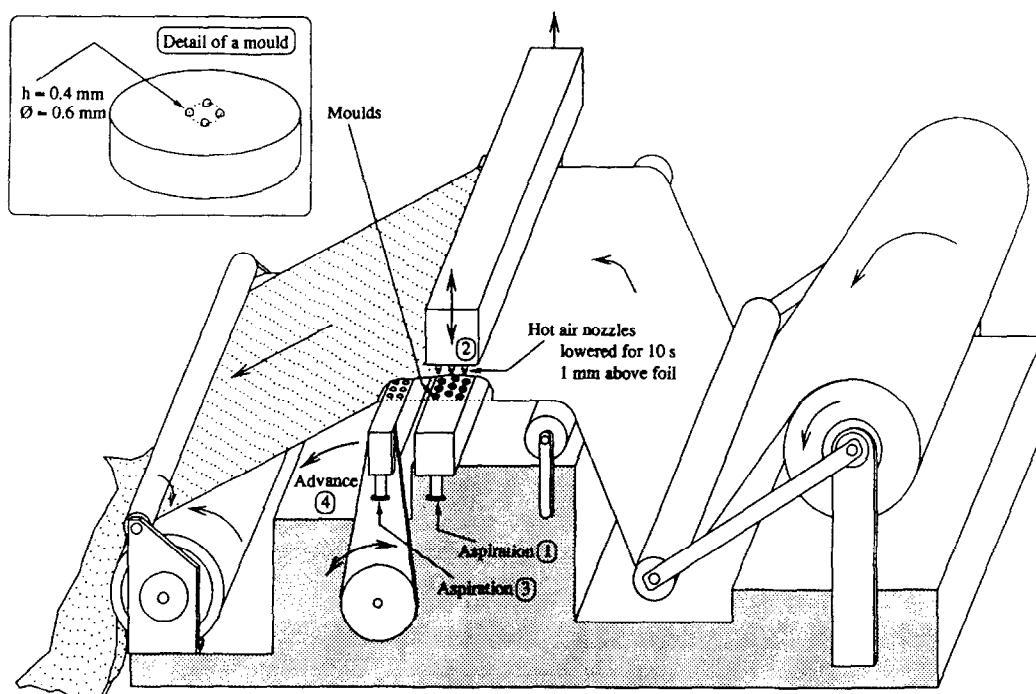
Principle of the radiator foil embossing machine (not to scale).
